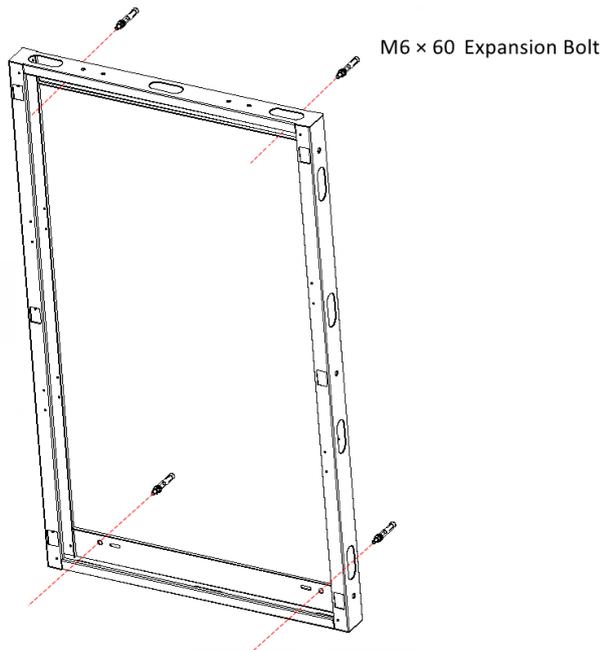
Install Wall-Mounted Rack onto the Wall
